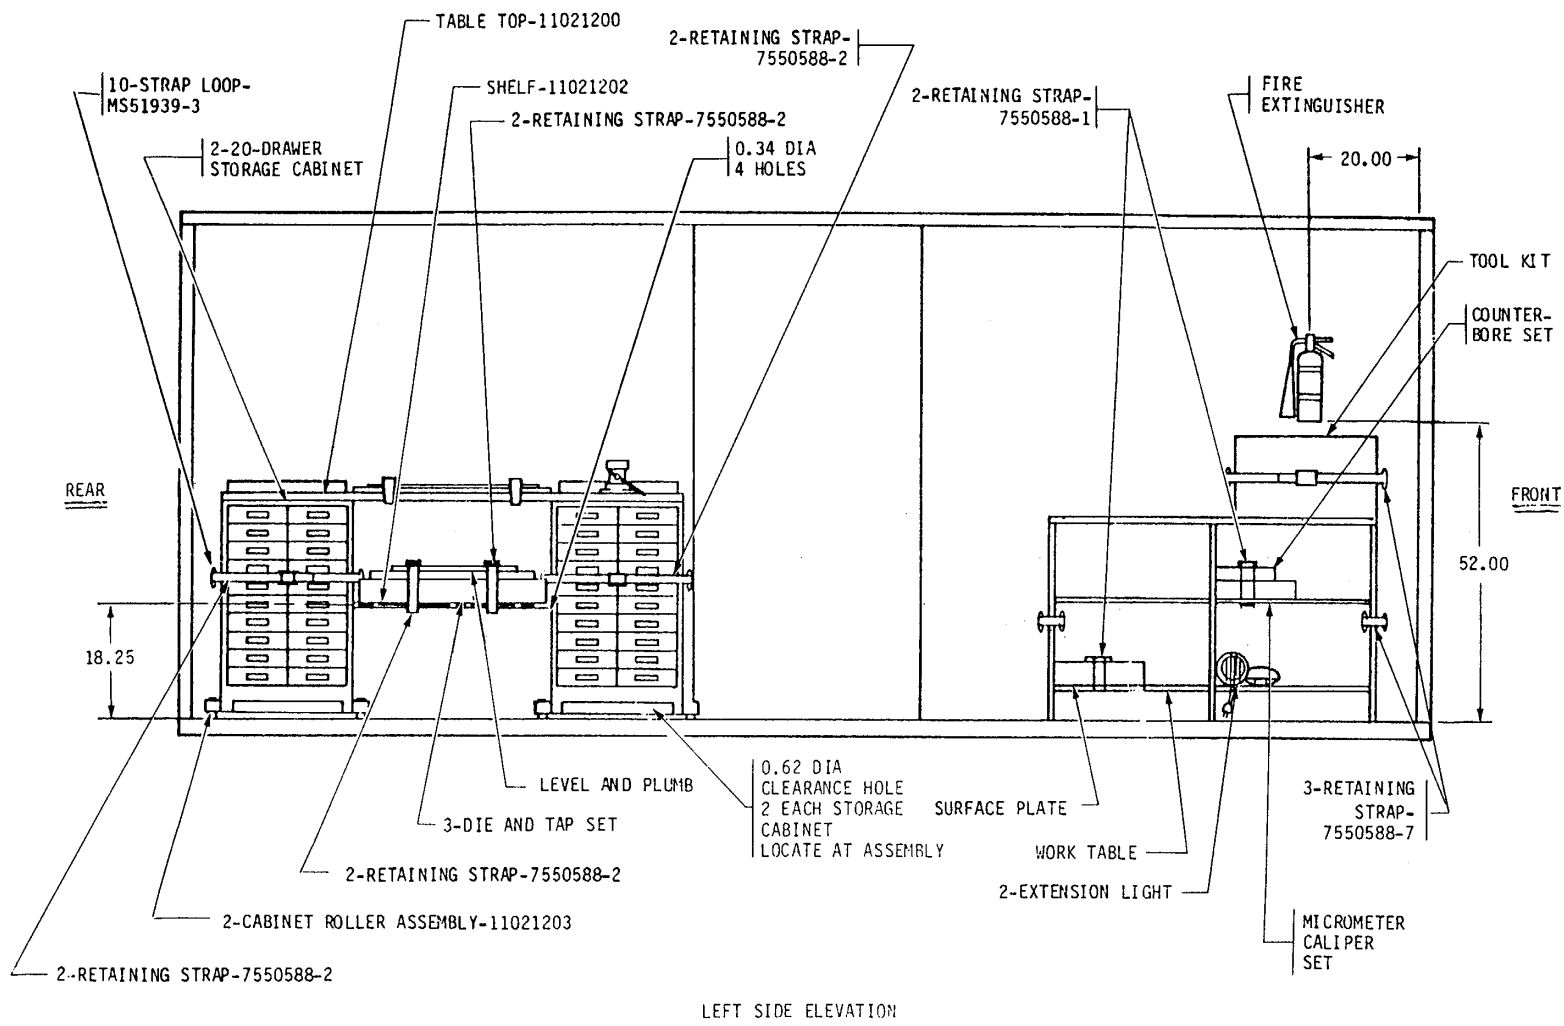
Components to be mounted, unit 2, ISO-2-1, left side elevation.
